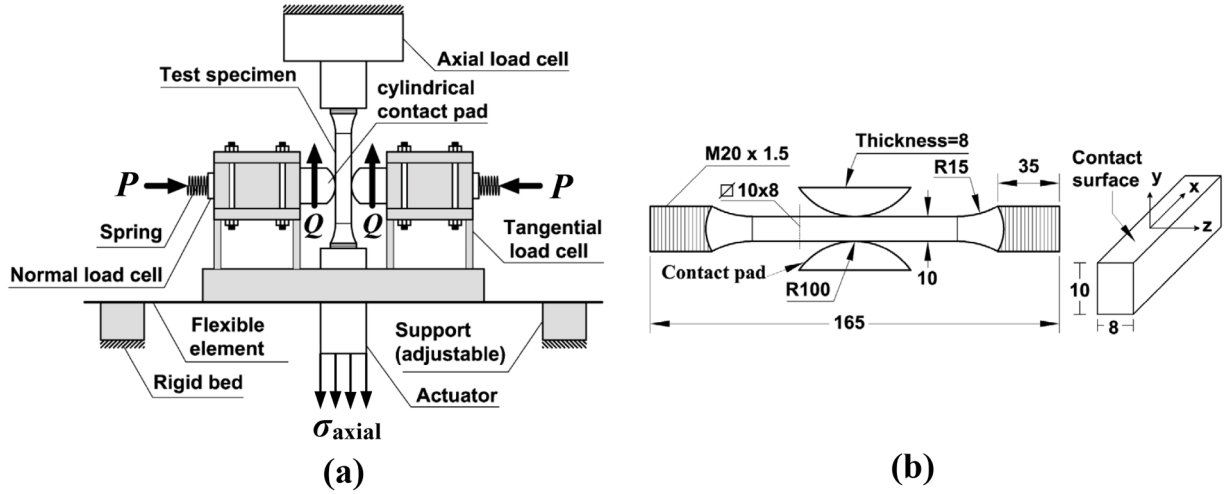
(a) Schematic representation of the device, and (b) dimensional drawing of the specimen (dimensions in mm) of fretting fatigue tests [19].
